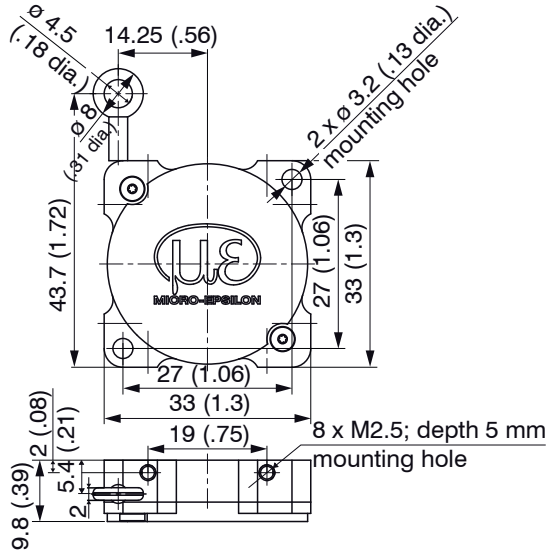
Dimensional drawing WDS-80-MT33-P, dimensions in mm, not to scale
